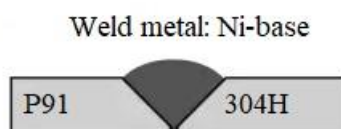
Dissimilar weld between martensitic and austenitic steels
